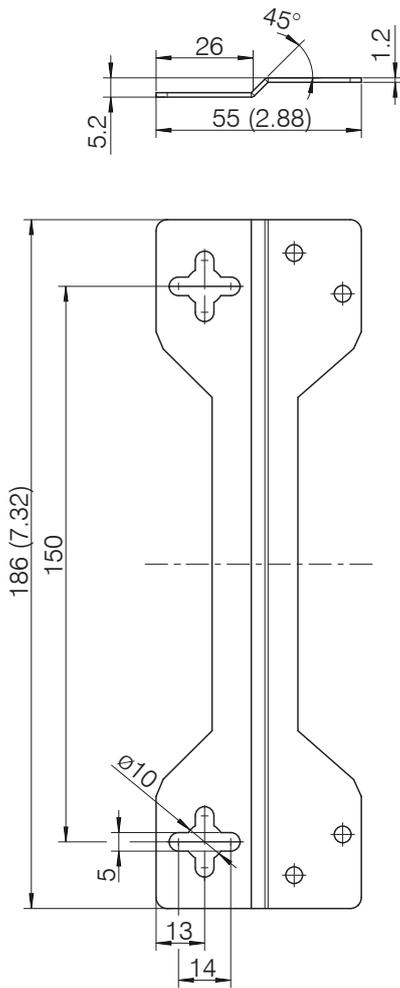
Dimensional Drawing of Mounting Adapter for table mount, dimensions in mm (inches, rounded off)
